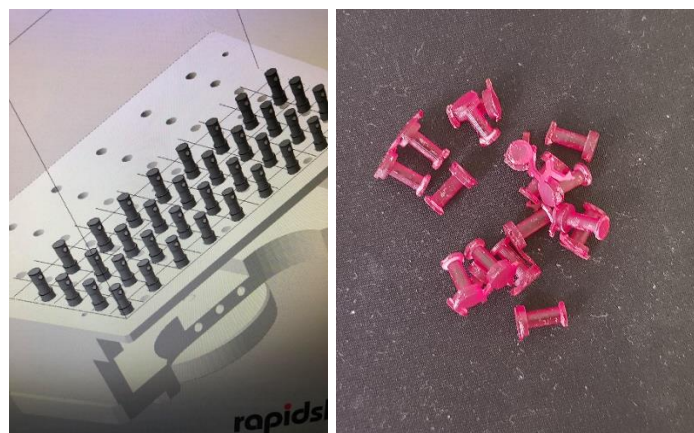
Shows the digital sample design and the resin sample printed out by 3D printer
